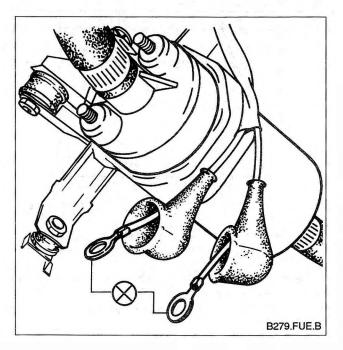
Voltage supply to fuel pump being checked with test light (shown schematically). Externally mounted fuel pump shown.
